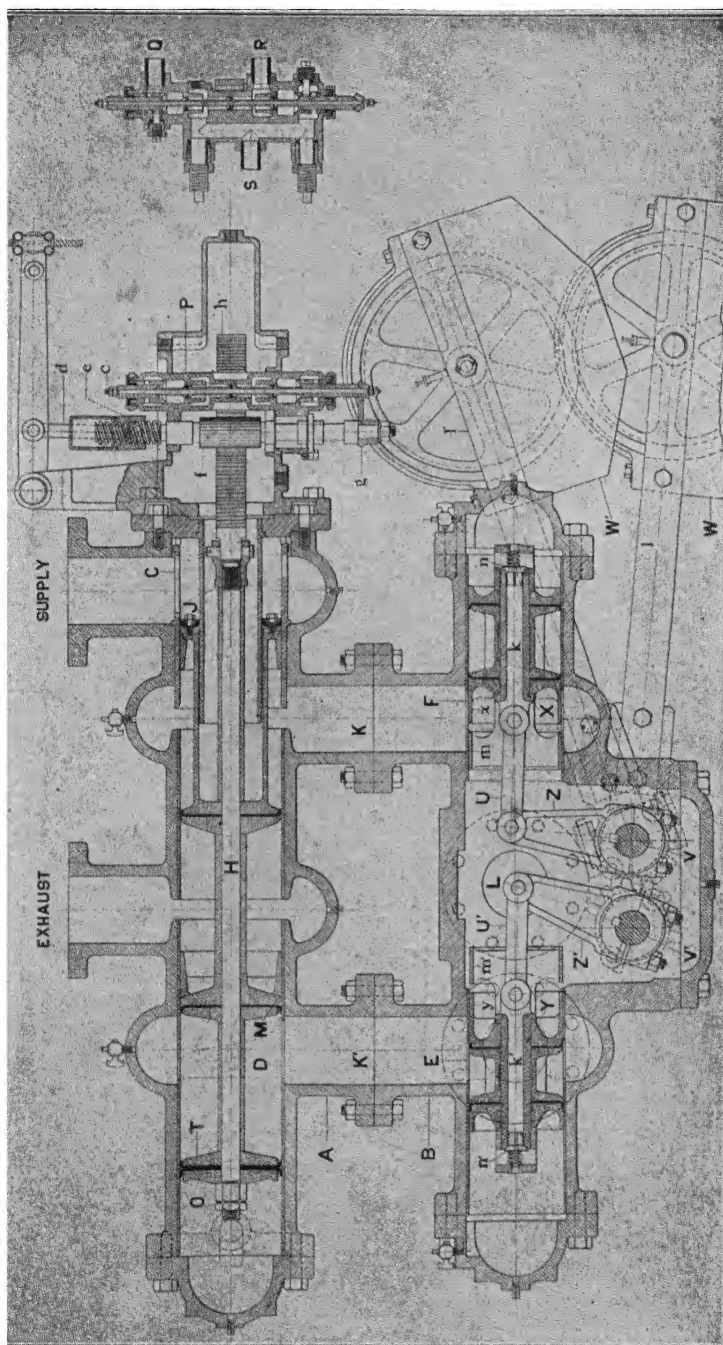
Sectional Details of Valve Shown in Fig. 116
